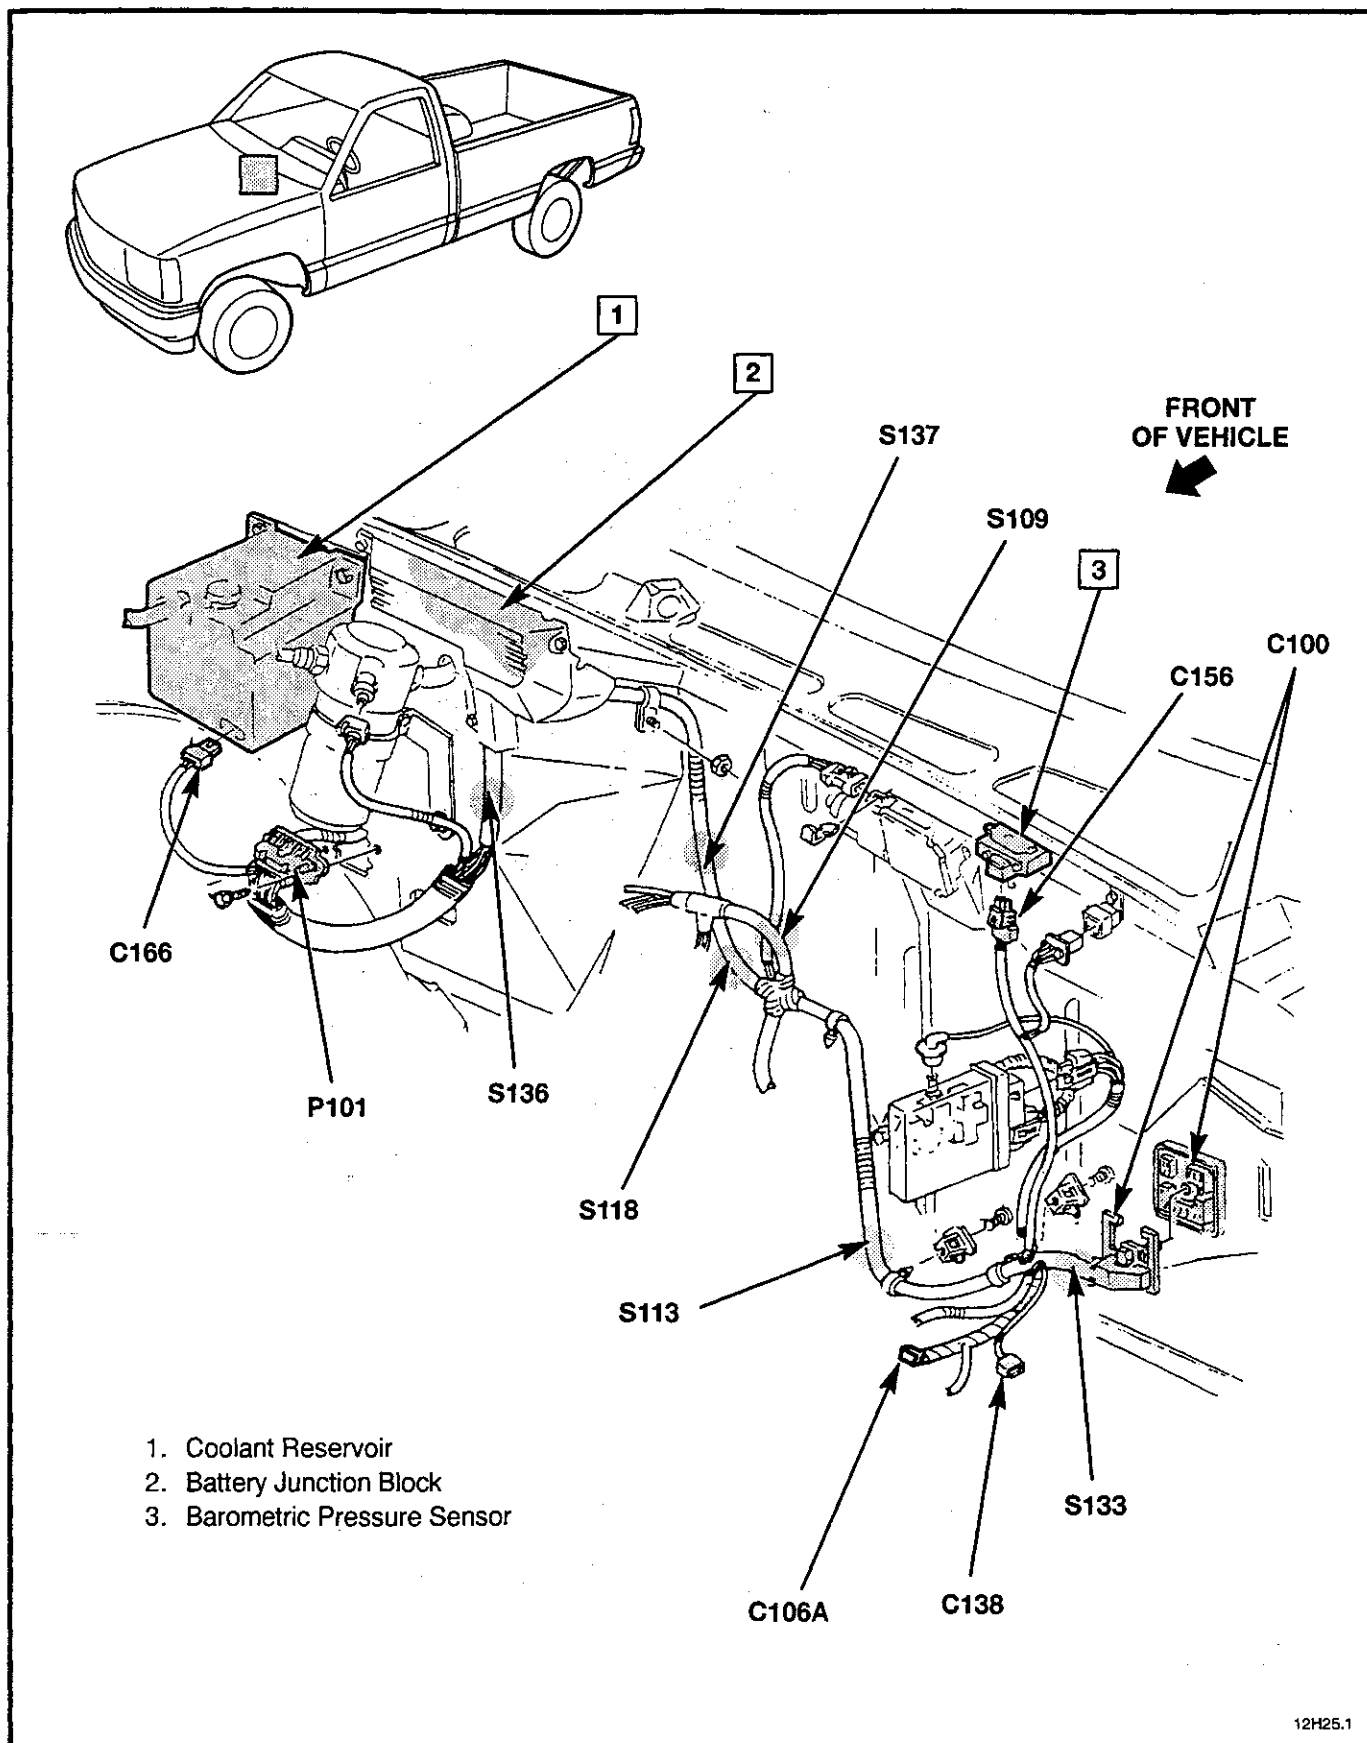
Cowl Wiring, (6.5L) Diesel Engine
